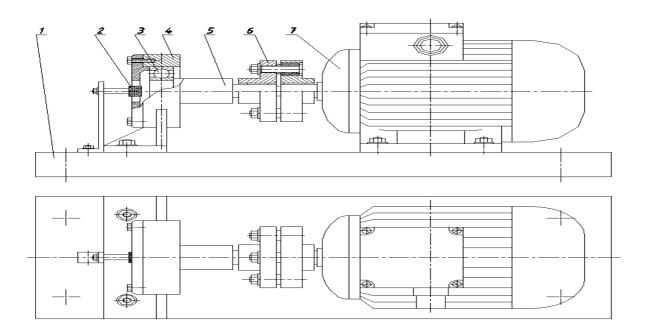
Installation for the diagnosis of roller bearings: 1 — frame; 2 — noise sensor; 3 — rolling bearing; 4 — bearing support; 5 — intermediate shaft; 6 — coupling; 7 — electric motor
